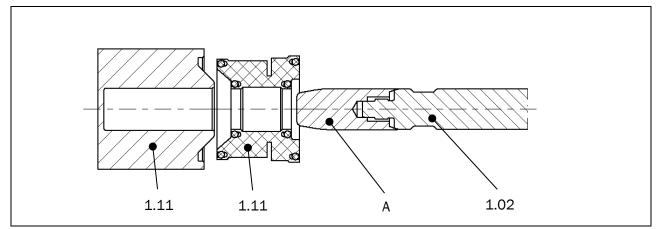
Overview of Assembly of Central Bearing with Assembly Cone
